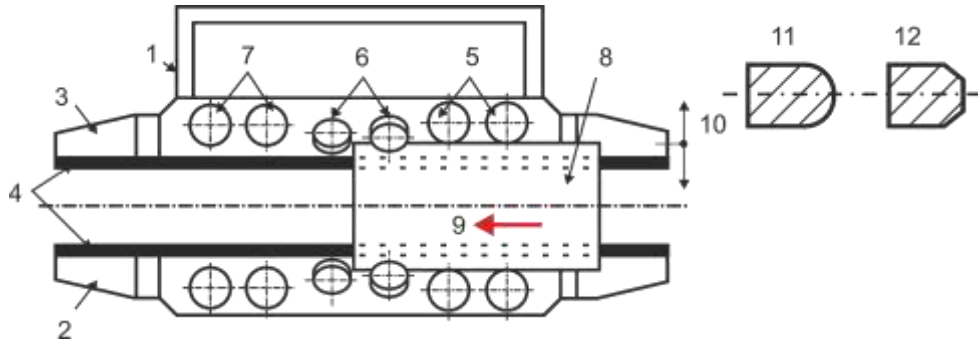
Diagram of machine for linear grinding of cutting surfaces and edges of flat glass sheets, 1 - machine frame, 2 - fixed side with grinding stations, 3 - adjustable side with grinding stations, 4 - belt conveyor, 5 - grinders for rounded or vertical grinding of the cutting surface (according to notes 11 and 12), 6 - pot grinders for chamfering, 7 - polishing wheels 8 - glass sheet, 9 - direction of feed of the sheet, 10 - adjustment of the machine to a given width of glass, 11 and 12 - options for choosing the shape of ground cutting surfaces of glass sheet
